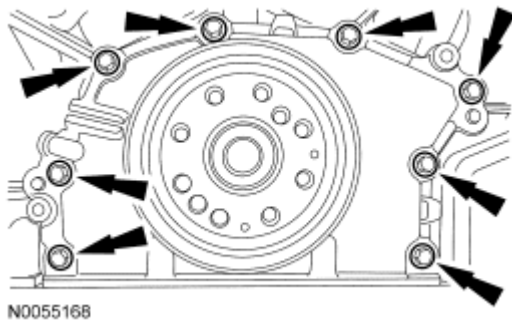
Locating Crankshaft Rear Seal Retainer Bolts
